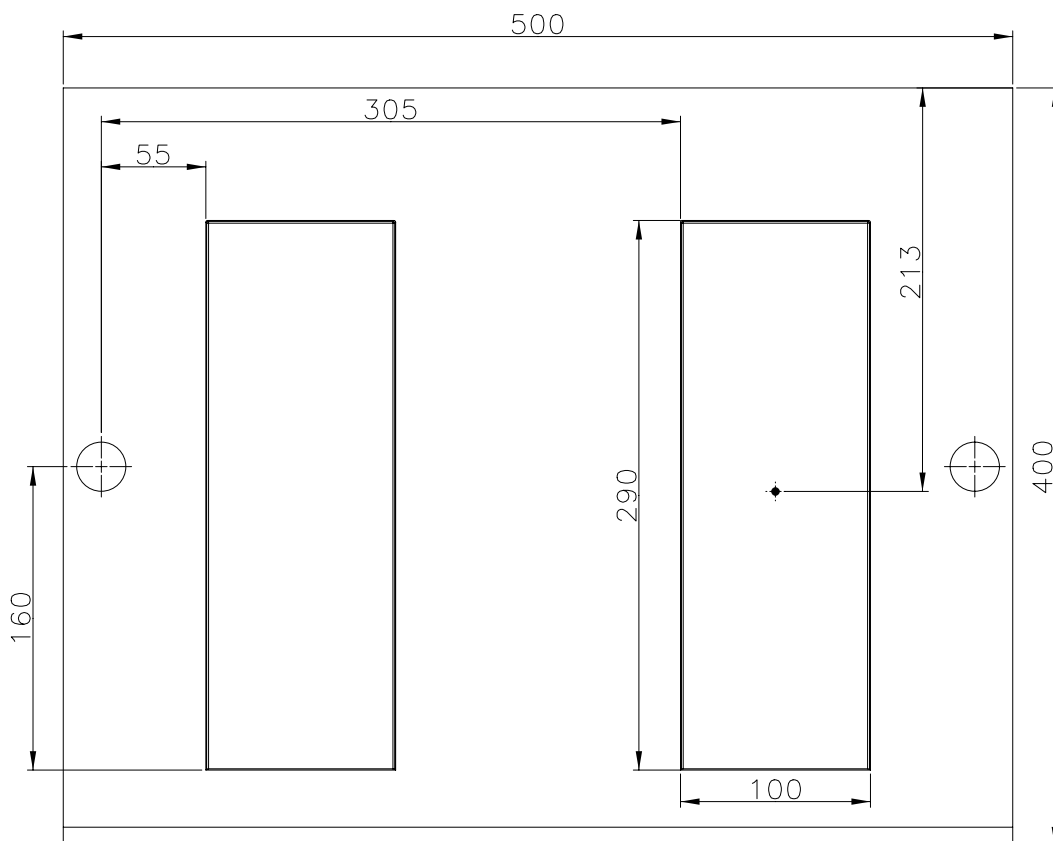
Basic layout for plate castings. Pattern plate made for a DISMATIC 2110.
